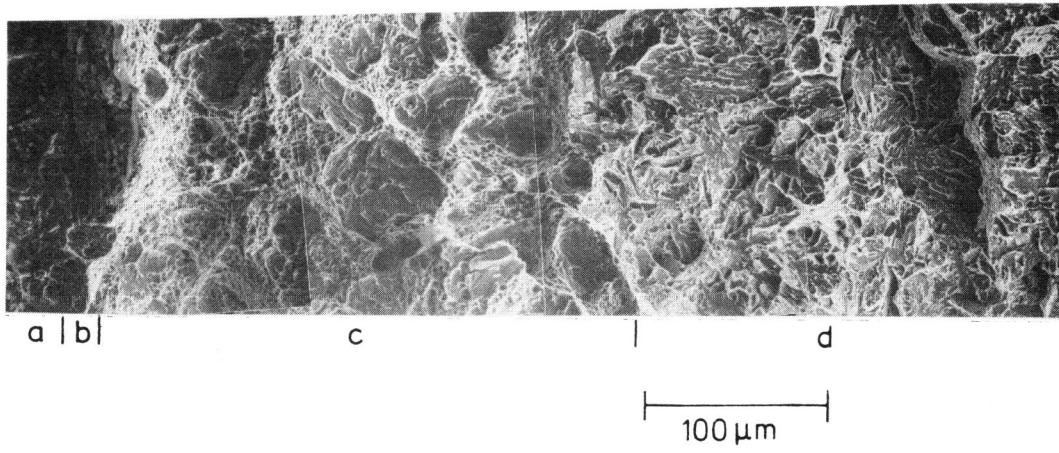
Fracture surface of a specimen with B = 15 mm fractured at -80°C
